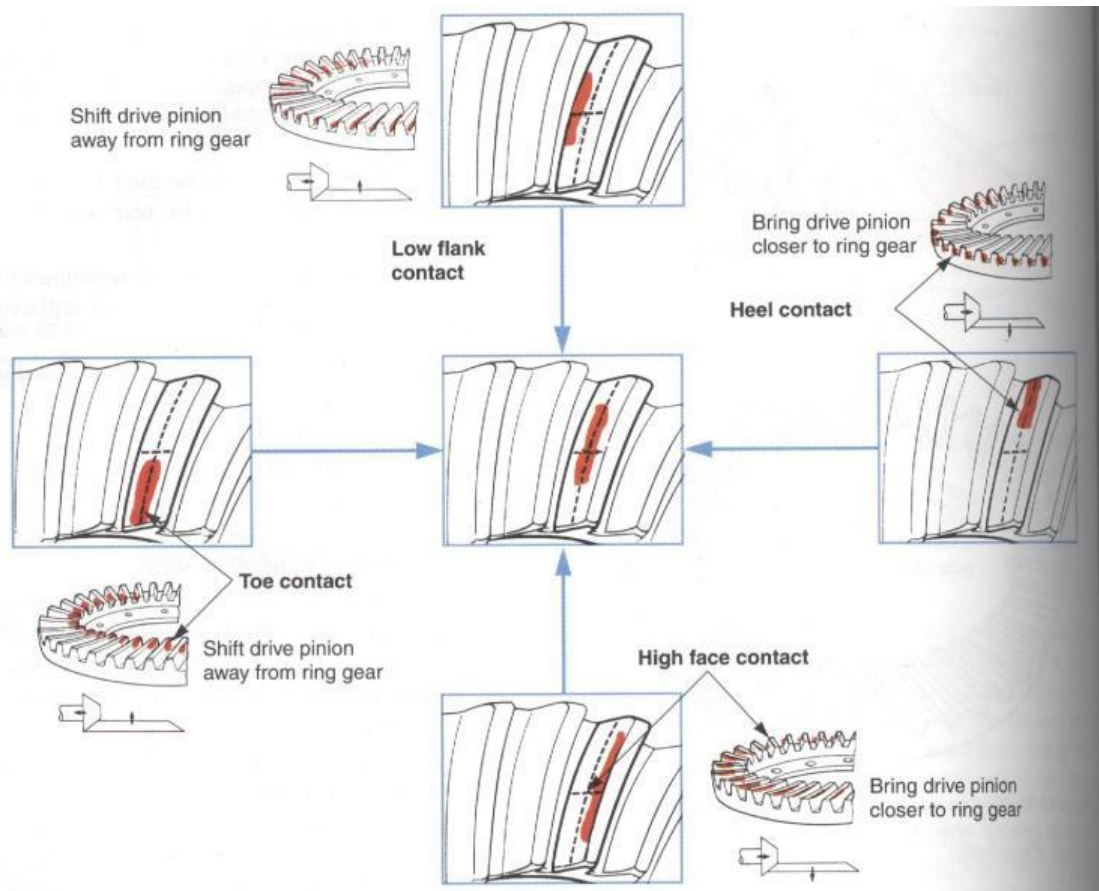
The area where grease is rubbed off the ring gear indicates contact point. It must be centrally located on the teeth.
